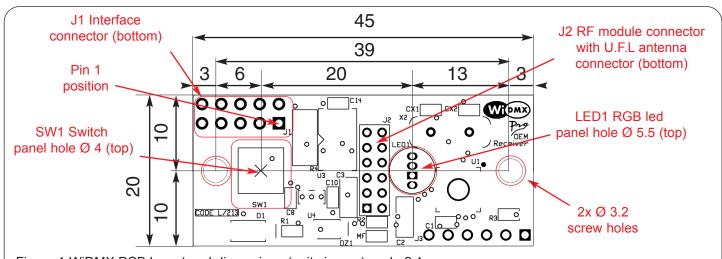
WiDMX PCB layout and dimensions (units in mm) scale 2:1
